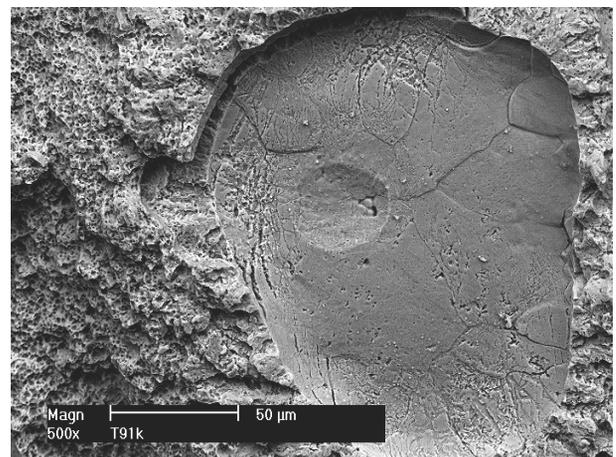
The hydrogen blister in weld metal of HSLA steel S690Q
